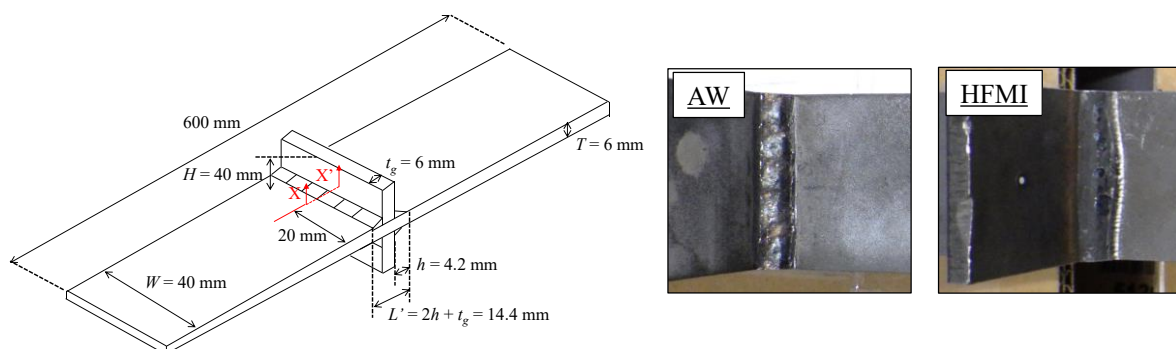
Configuration of the non-load-carrying attachments, Reprinted with permission from ref. [27]. 2021 International Journal of Fatigue (in axonometry and pictures showing weld geometries).
